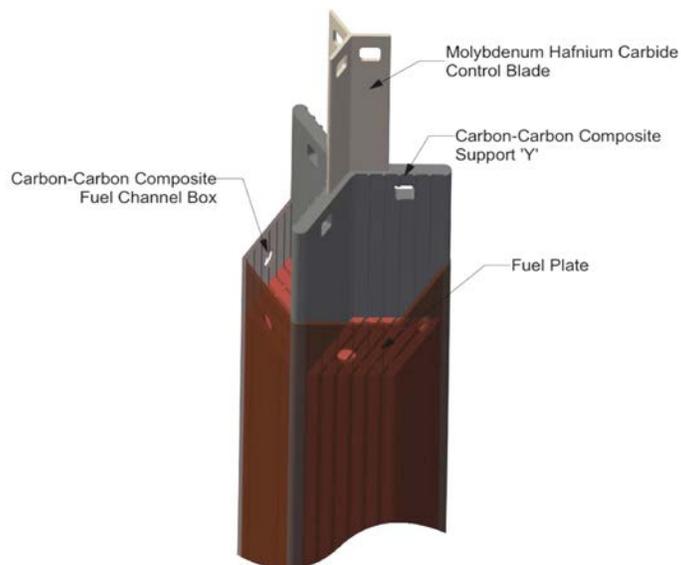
3-dimensional side view of reference AHTR fuel assembly.
